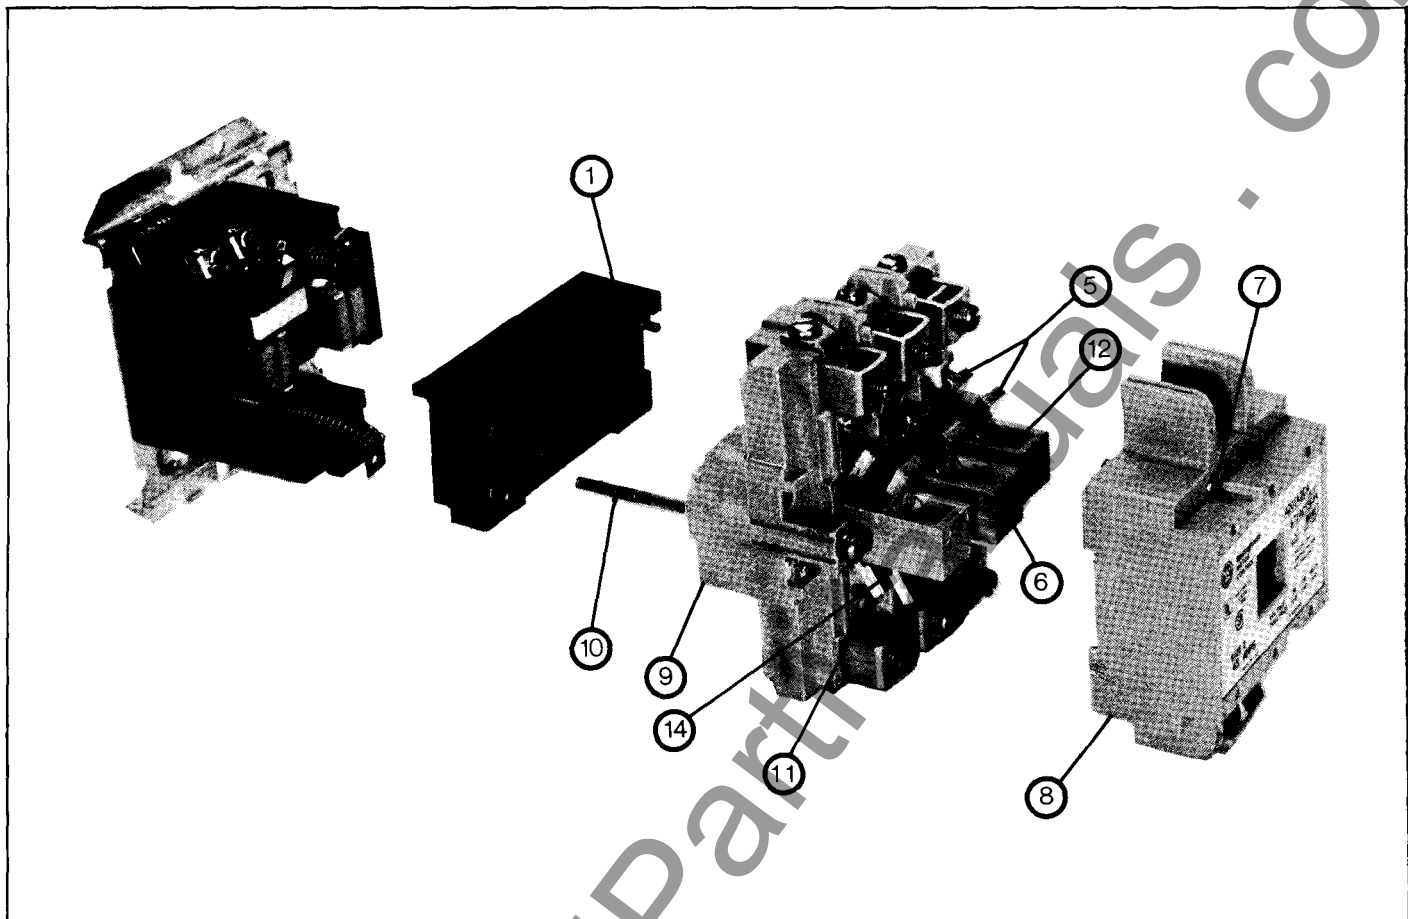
Size 2 A210 or A250 Contactor (Exploded View)
